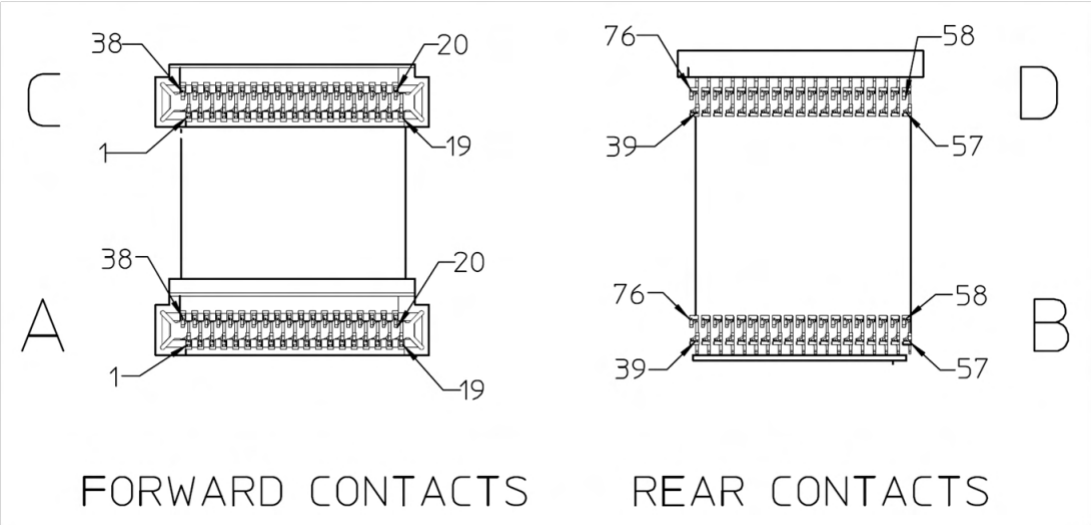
Connector pads in 2x1 SMT stacked cage as viewed from front
